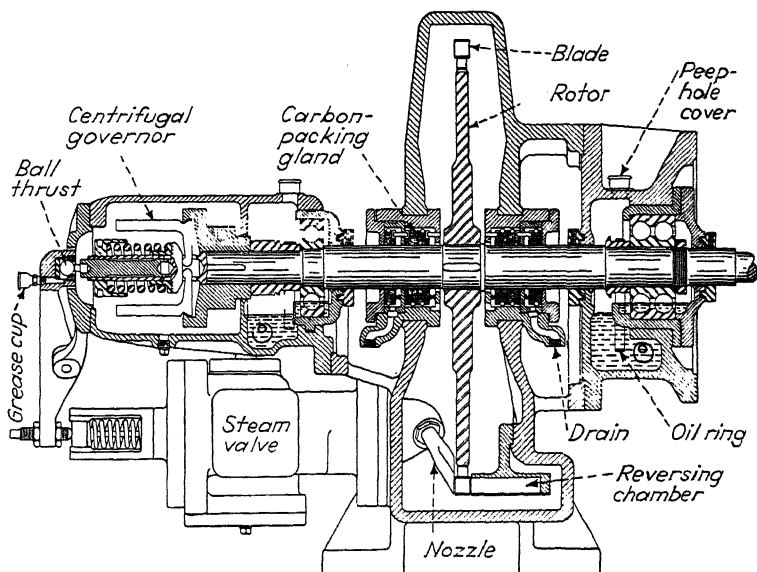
Horizontal mechanical-drive turbine with ring-oiled ball bearings.
